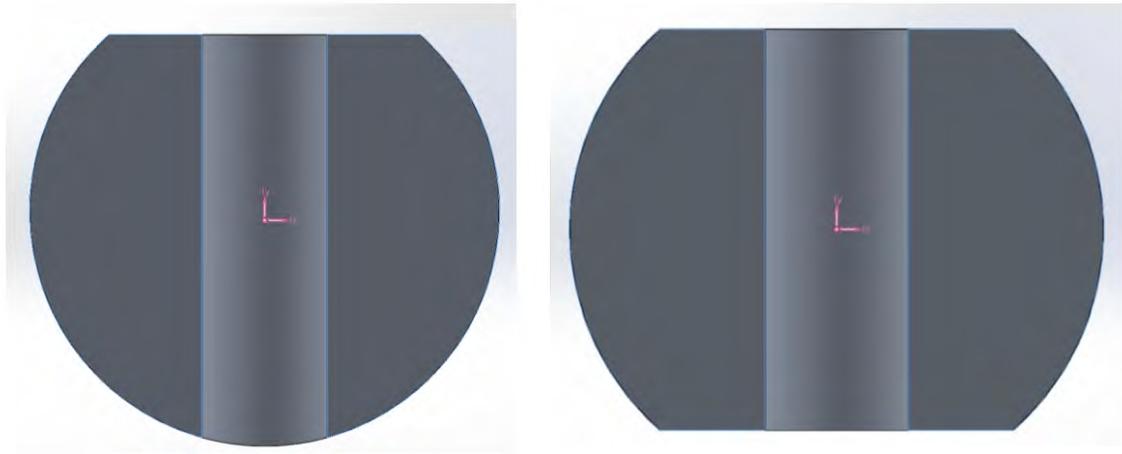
9 (L): Cross-Section - As-Built Fuselage, (R): Cross-Section - Initial Fuselage Design
